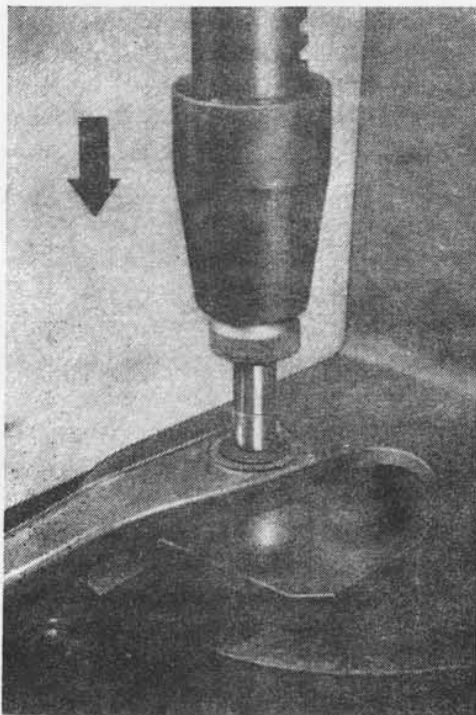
/2 - Pressing Spacing Tube into Rubber Bush Using MP 6-122 Drift
